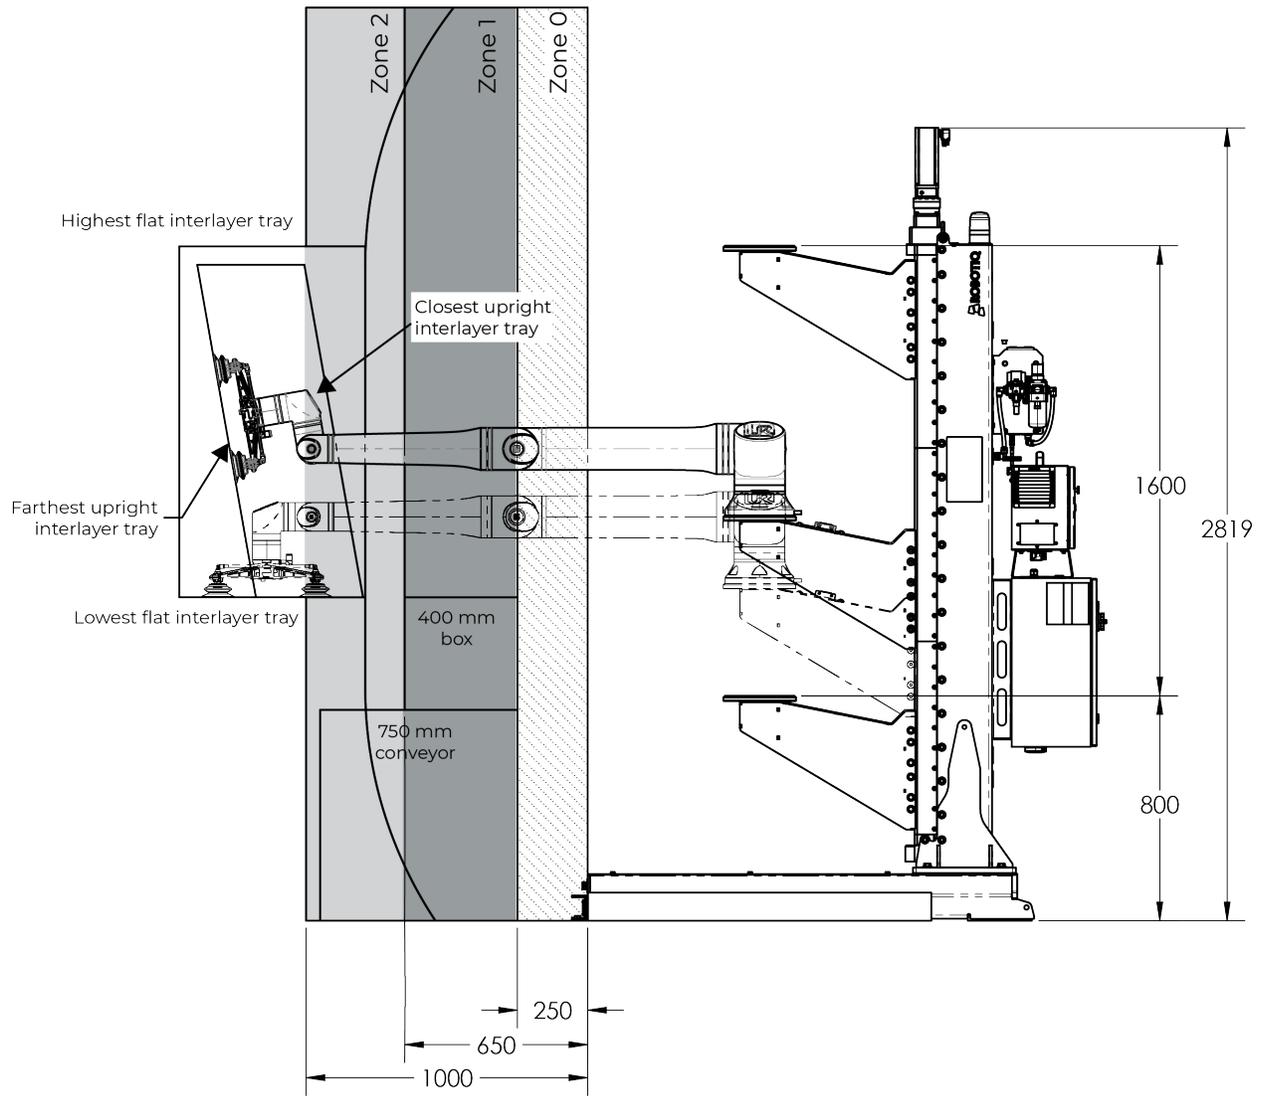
AX20 Palletizing Cell Layout - Side View
